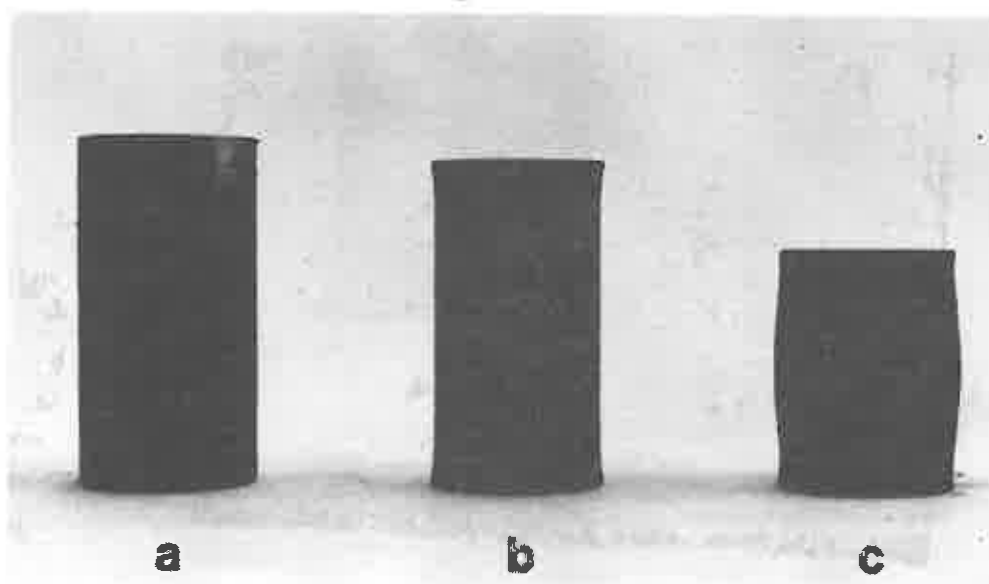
The shape of the hard metal powder specimens: a) undeformed, b) after a hydrostatic compression test, c) after a triaxial compression test
